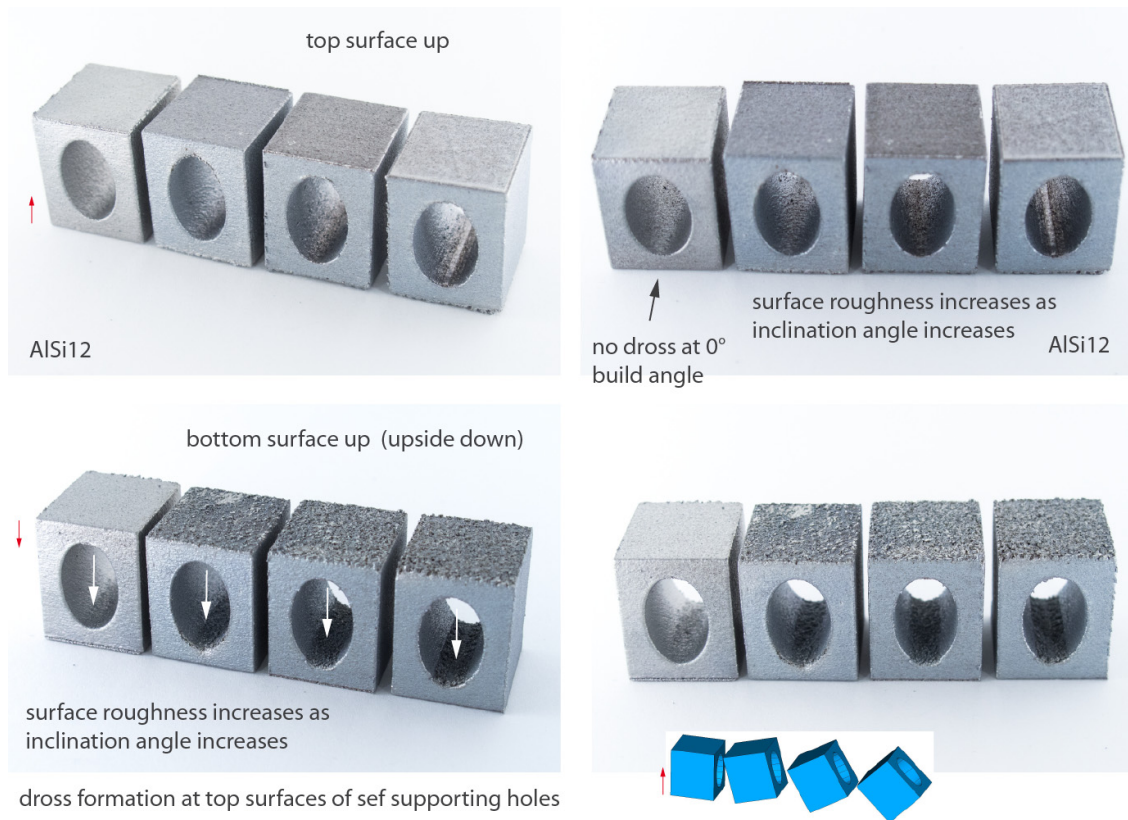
Remarks of the elliptic hole test pieces, AISi12.
